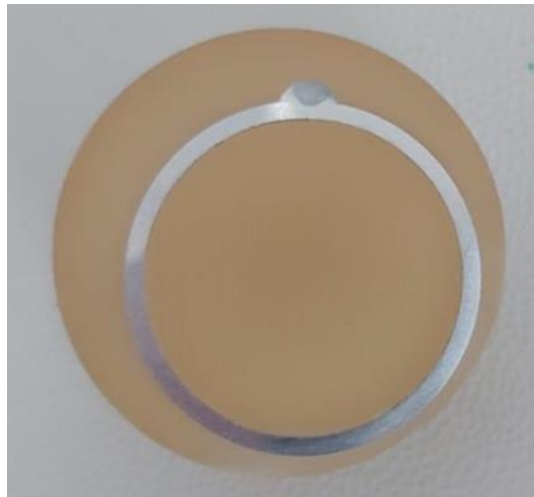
Macrograph of MIG welding 7005 T6 pipe.
